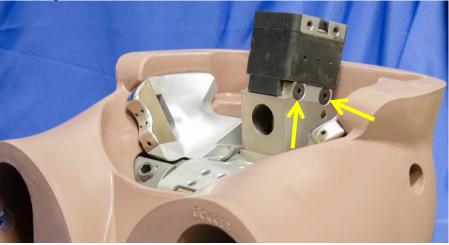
Attach lumbar flex joint to pelvis/lumbar mounting block
